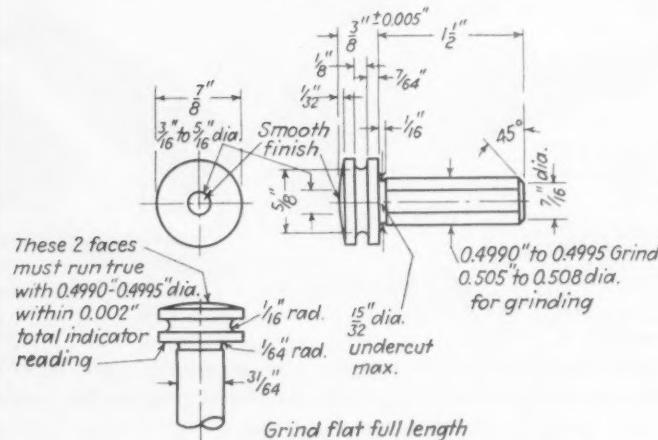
This part is headed, but the grooves in and below the head are turned. Steel used is SAE 4140.
